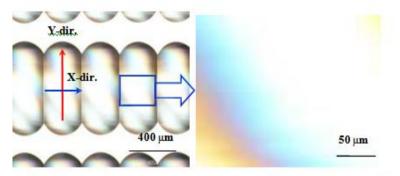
Nomarski micrographs of machined ellipsoidal array mold
